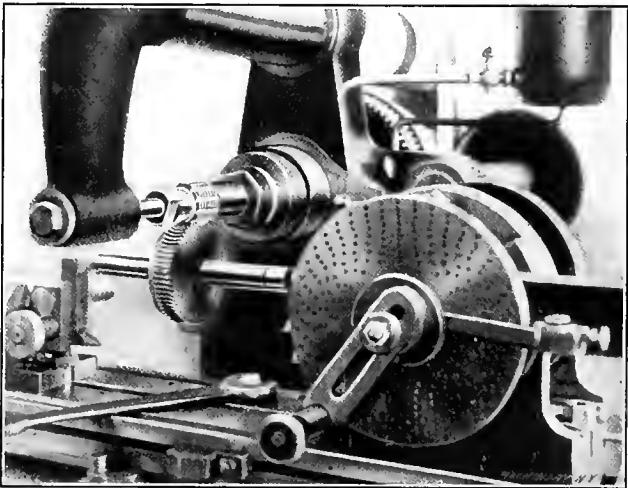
Hobbing a previously Gashed Worm-wheel on Dead Centers in the Milling Machine.
